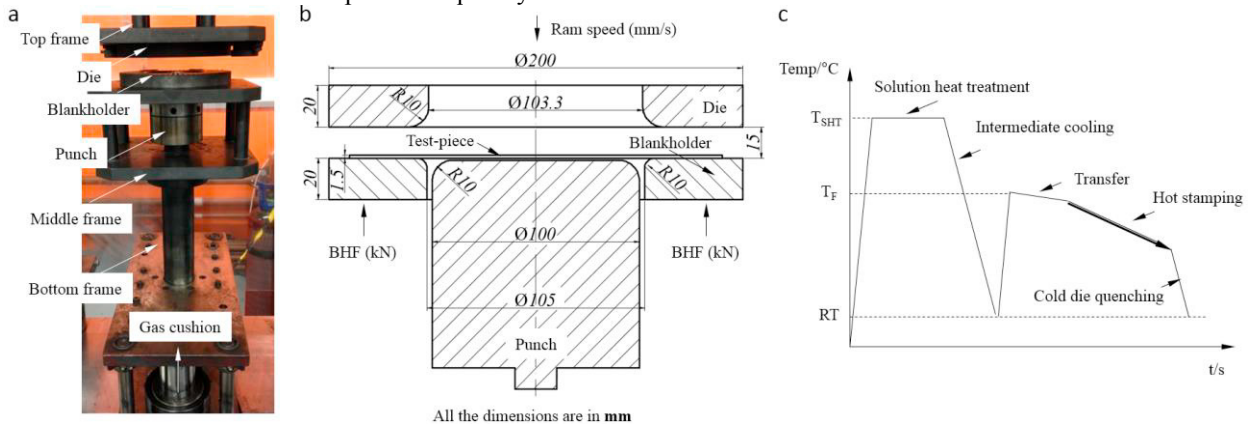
(a) Experimental set-up; (b) Dimensions of tools and (c) Hot stamping procedure [6]
